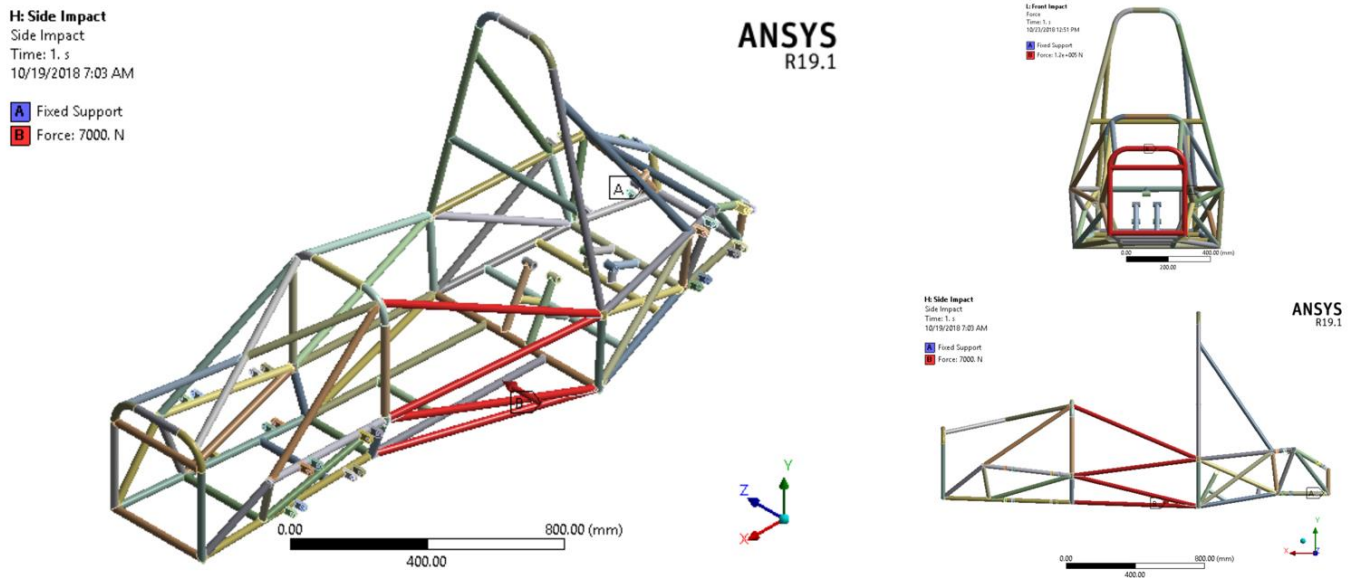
Side impact load applied on the Formula SAE M1 Chassis (front, side, and isometric view)
